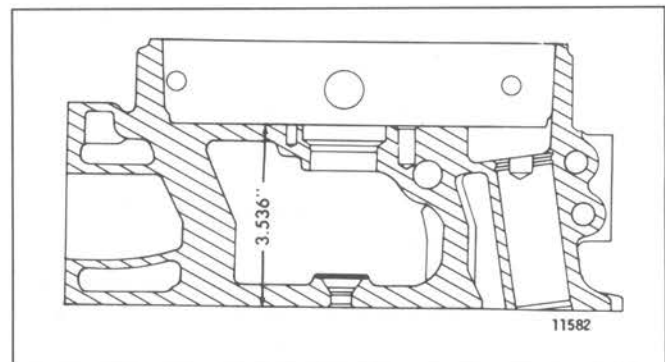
Minimum Distance Between Top and Bottom Faces of Cylinder Head
